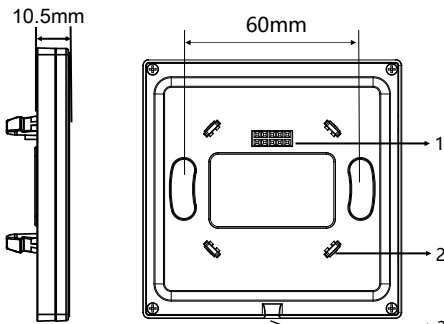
Dimensions - Front View Figure 4. Dimensions - Side View
